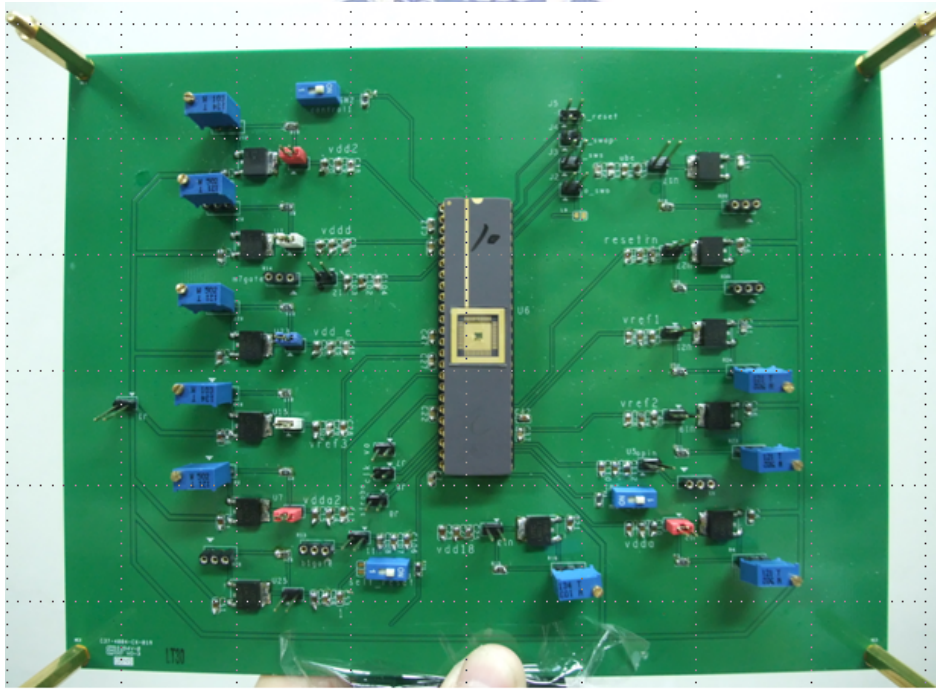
The PCB design of 68cell 3T current mode sensor
